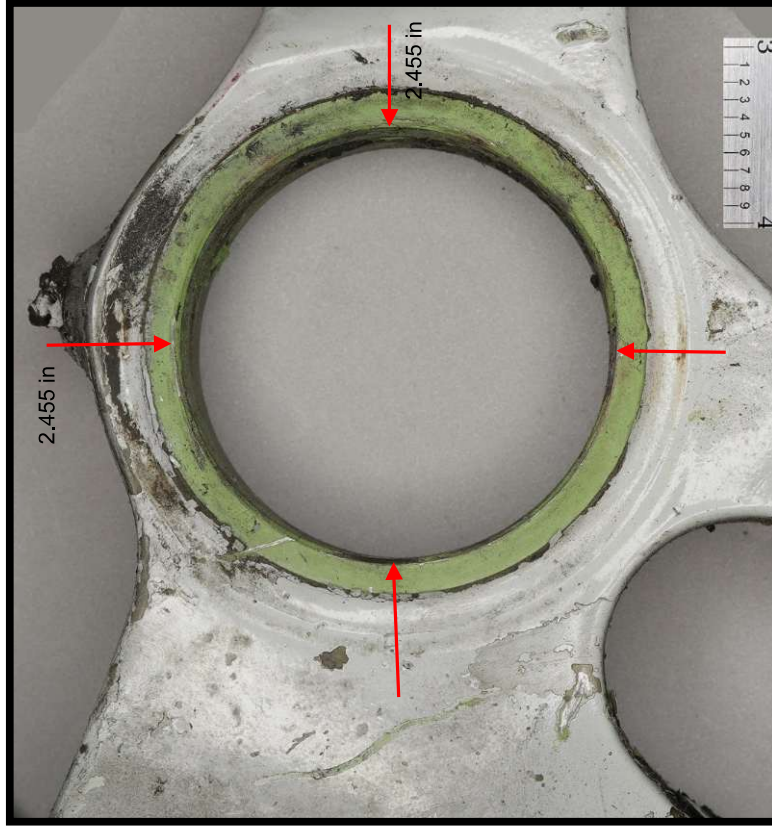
Overall view Universal Side Strut Fitting with Tee Bolt Bore Diameter.
